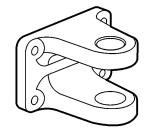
Towing Pintle, 8 in. Frame Extension with Heavy-duty Front End (Axle Forward Configuration Shown)
